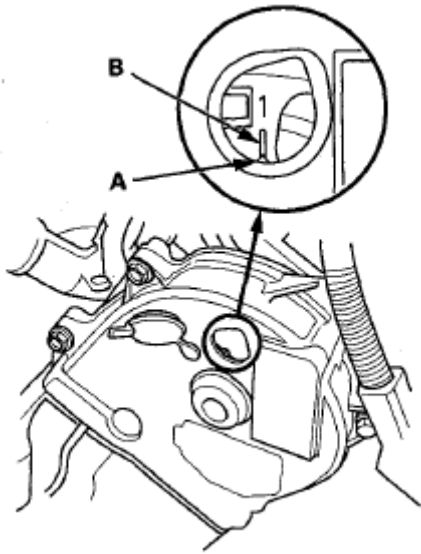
Identifying No. 1 Piston TDC Mark On Front Camshaft Pulley
